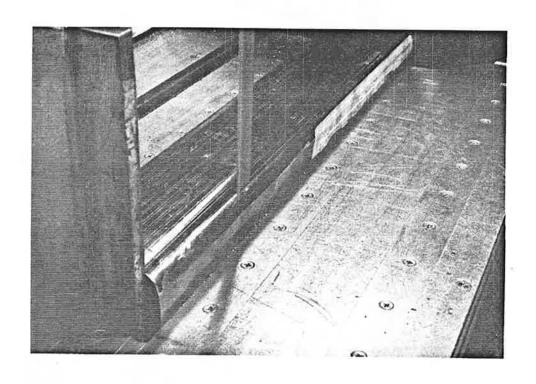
FURTHER CUTTING OF RAIL HEAD TO OBTAIN MEIER RODS
